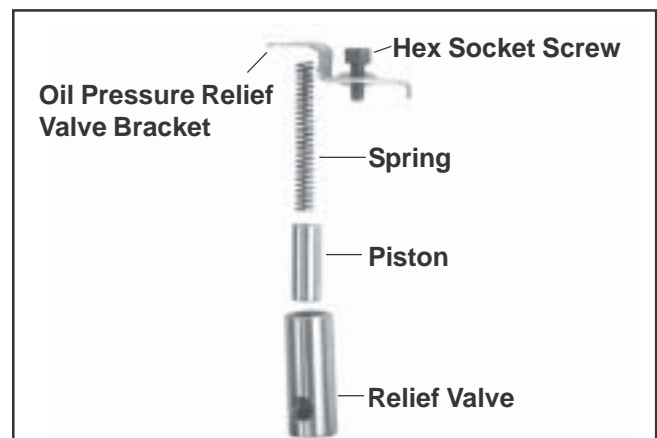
Installing Oil Pressure Relief Valve Body, Plunger, and Spring.
